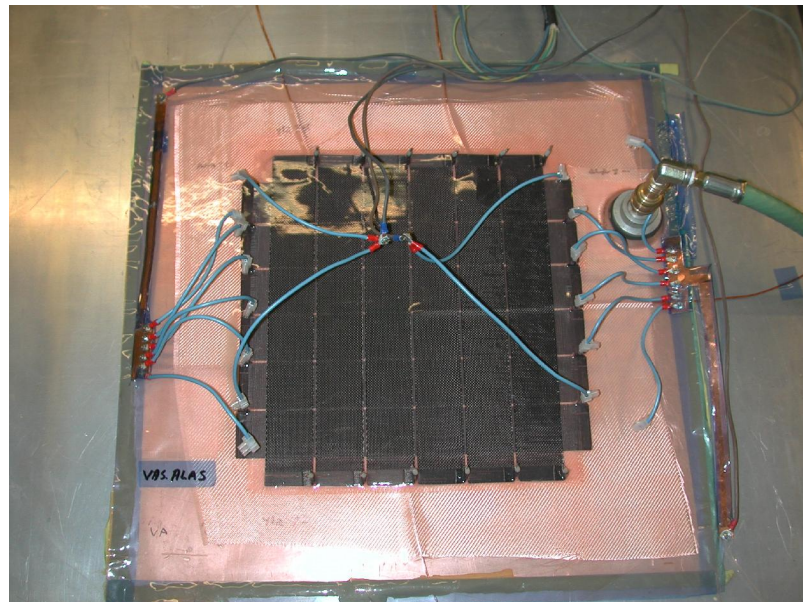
Multizone (6 x 6) combined carbon fibre heat blanket/vacuum bag over an aluminium test table with heat sinks. Courtesy of TKK / KRT and the FIAF.
